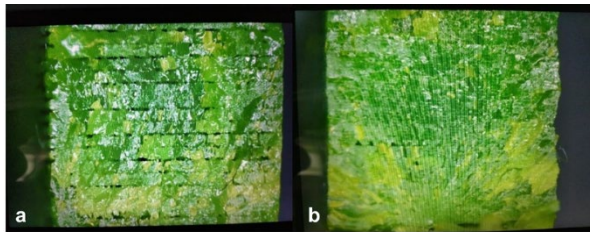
Fracture surfaces of (a) neat rPET and (b) rPET blend impact test specimens
